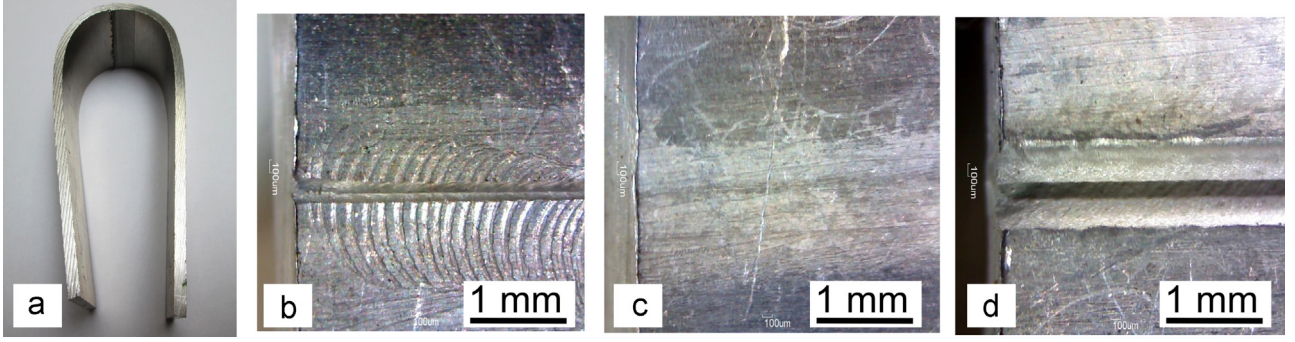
(a) Example of bending test, (b) bending test results with pin positions of (b) -1.5 mm, (c) 0 mm and (d) 1.25 mm
